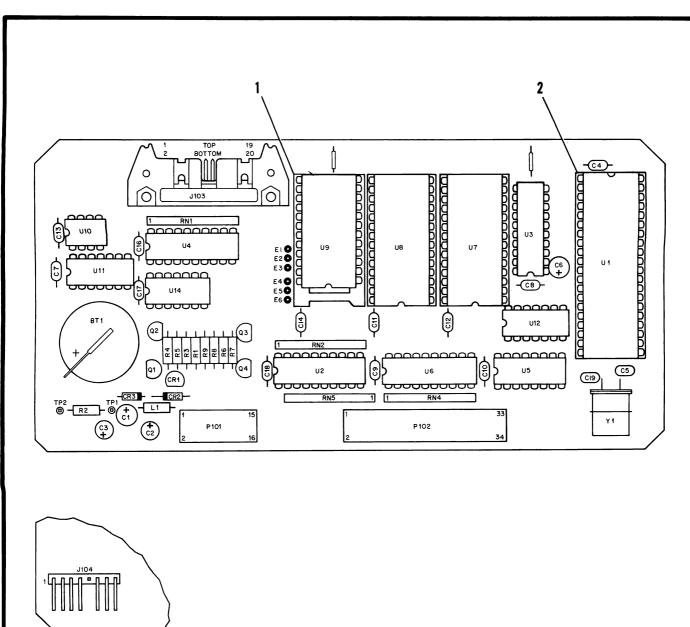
PROCESSOR PC BOARD ASSEMBLY
